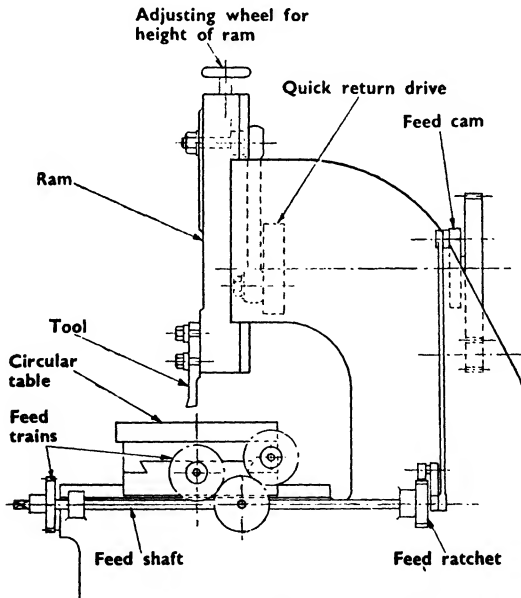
DIAGRAM OF A SLOTTING MACHINE
